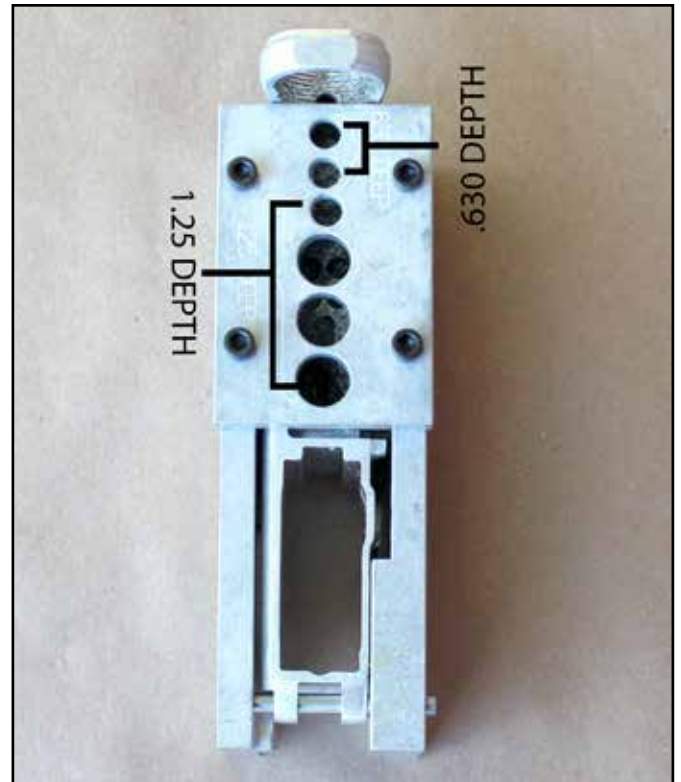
Shown above is the jig completely assembled with the drilling plate installed. Note the different drilling depths.
